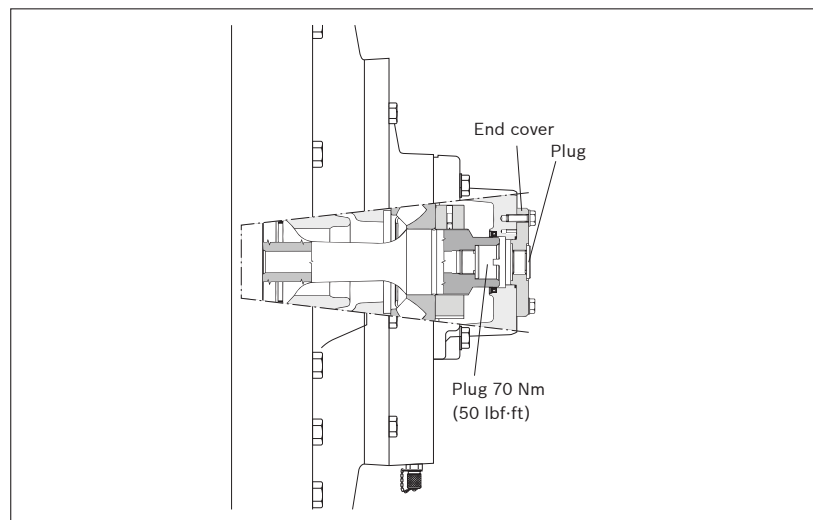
a: Mounting the MA 141–200 and MB 283–800
